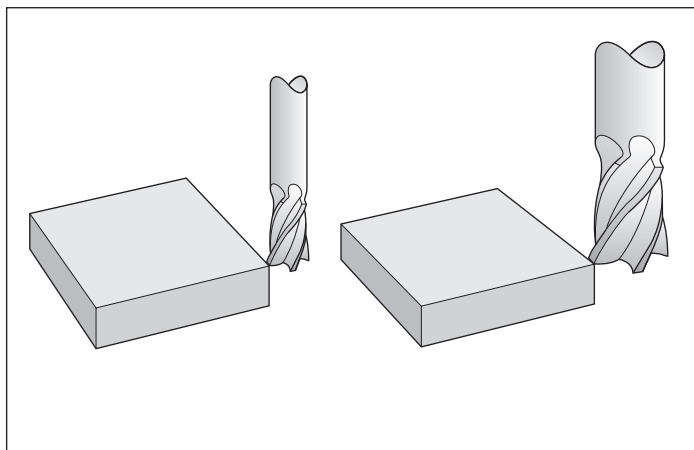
The TNC must compensate the length and radius of the tool
